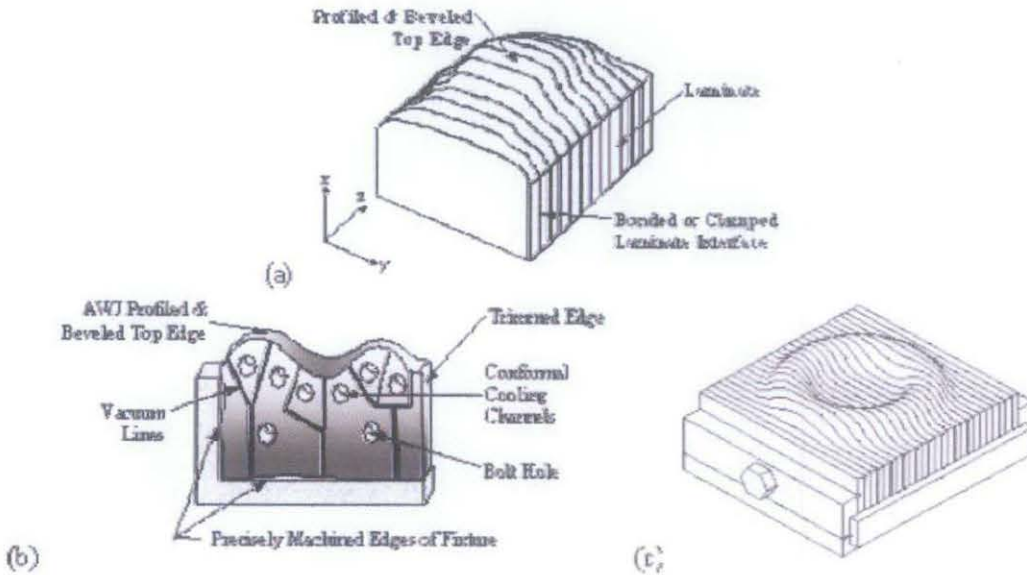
Schematics of (a) unclamped PEL tool, (b) possible features of an individual laminate, and (c) a completely clamped PEL tool
